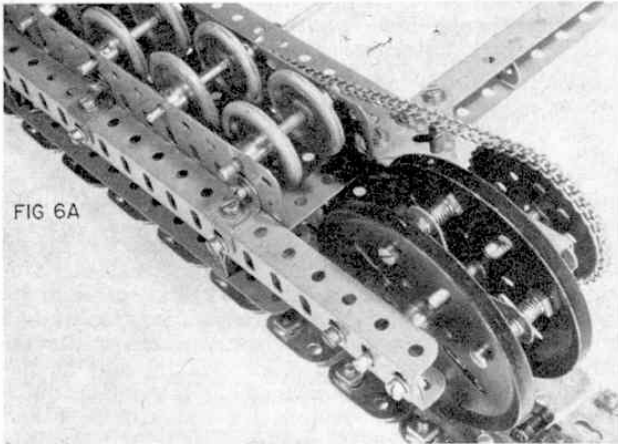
An underside view of the heavy-duty track frame showing support rollers and drive sprocket containing $2\frac{1}{2}$ in. Strips used as driving "dogs."
